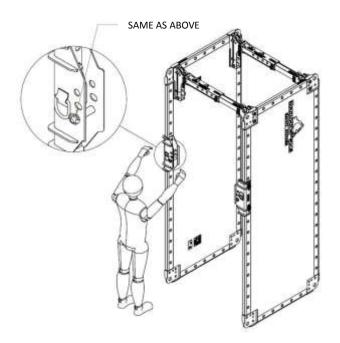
Assembly Step Nine – Install Second Bottom Clip On Lugging
